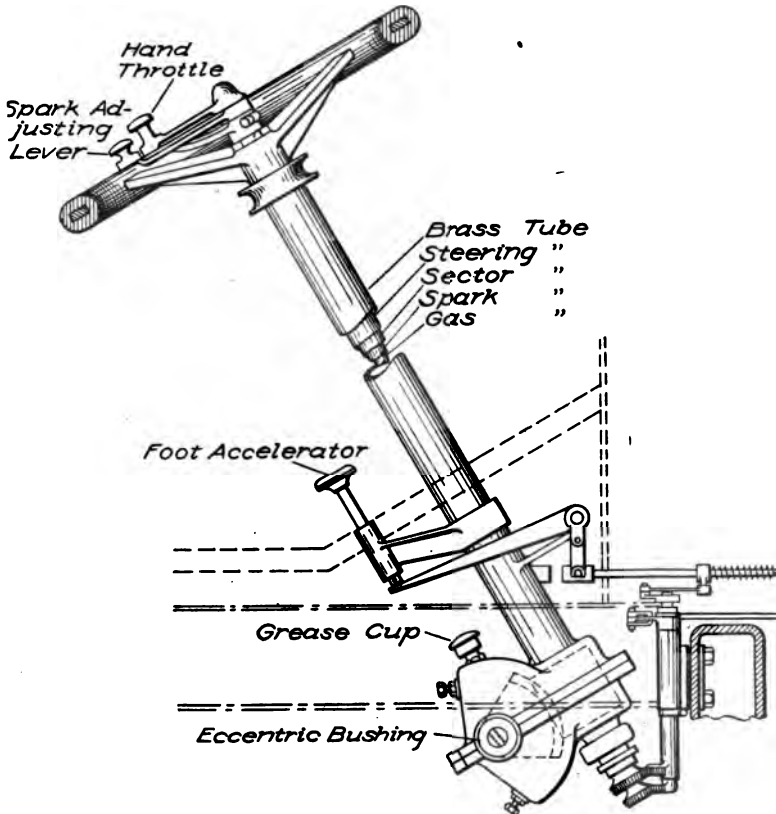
Section of Steering Column, Showing Spark- and Throttle-Levers and Connections.
